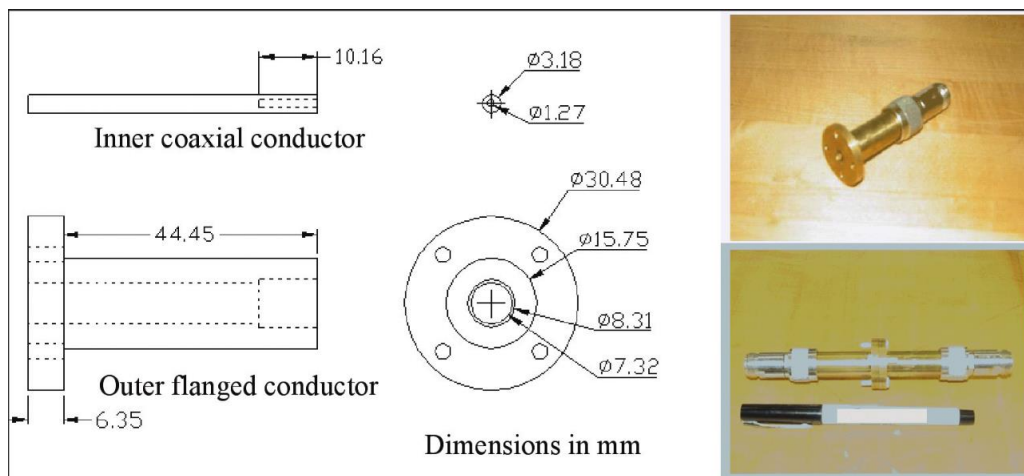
Manufacturing drawings and photos of SE tester developed in UTPA [3].
